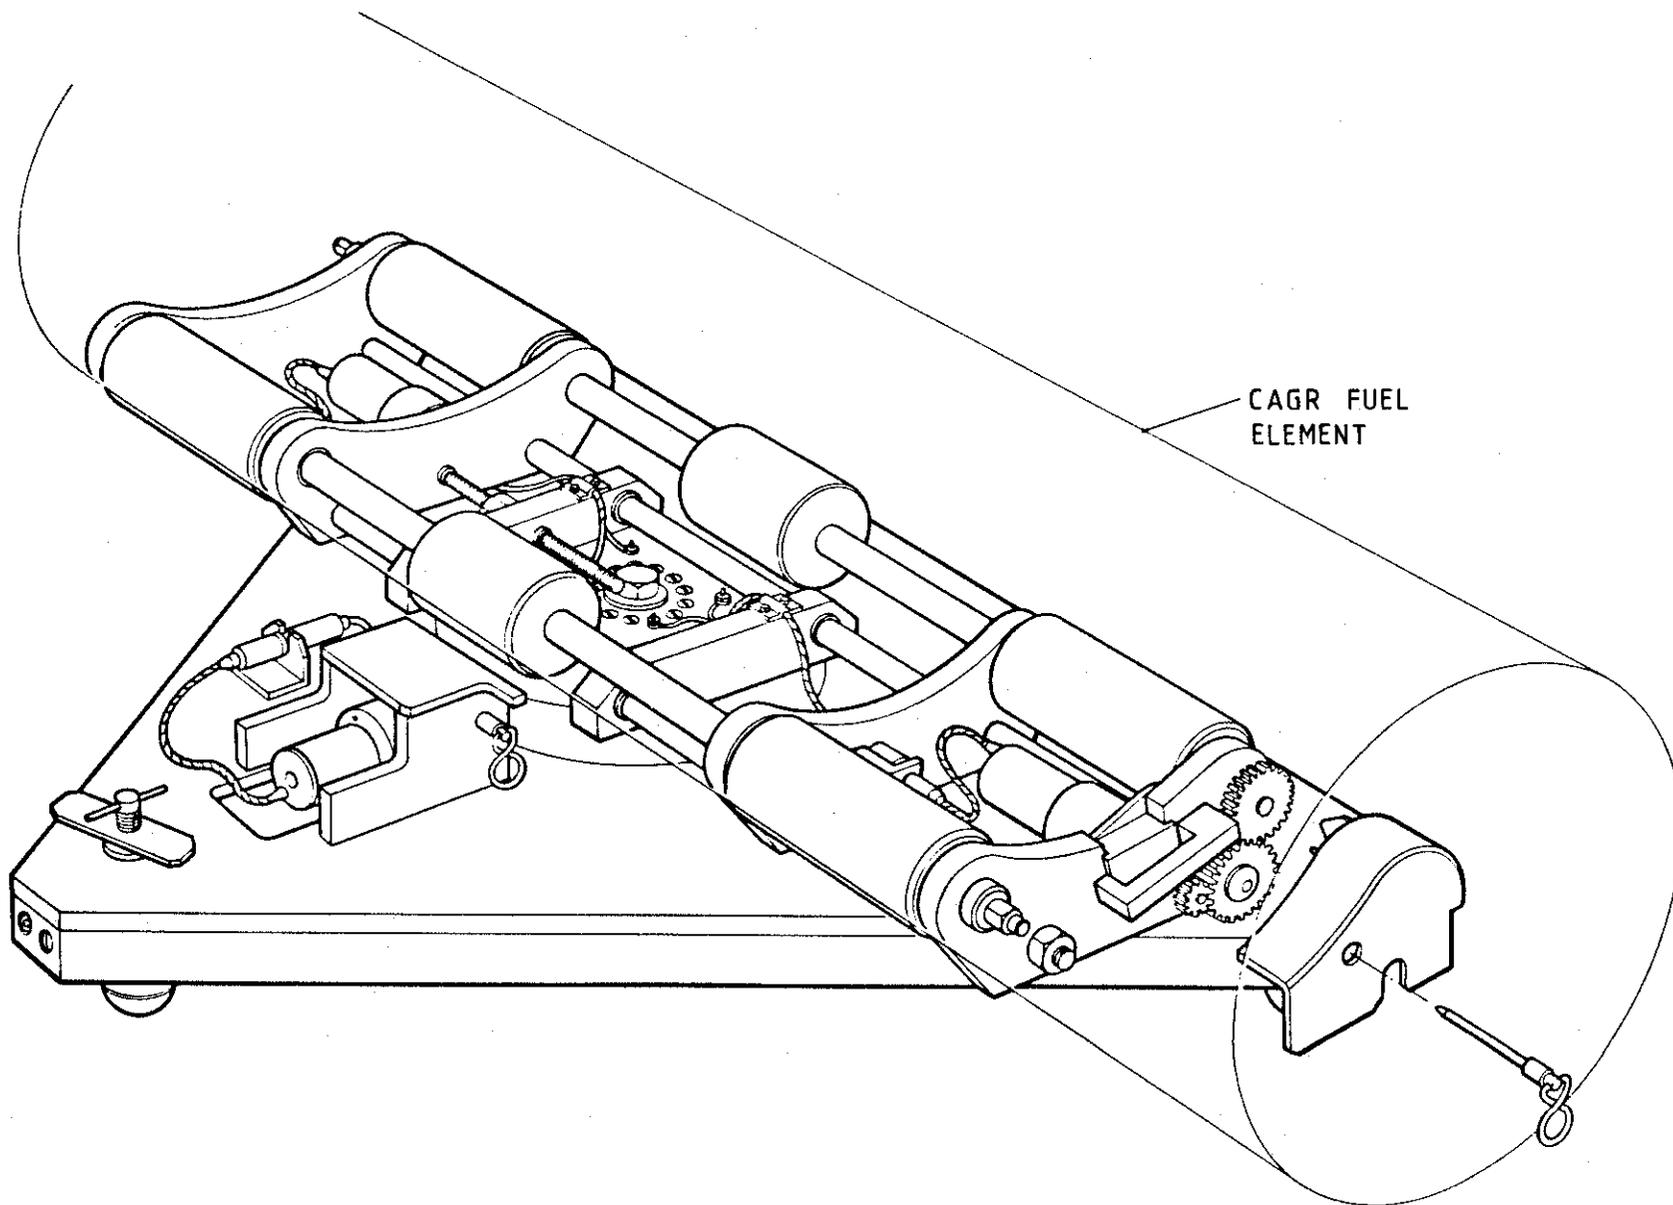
FUEL ELEMENT INSPECTION TURNTABLE
